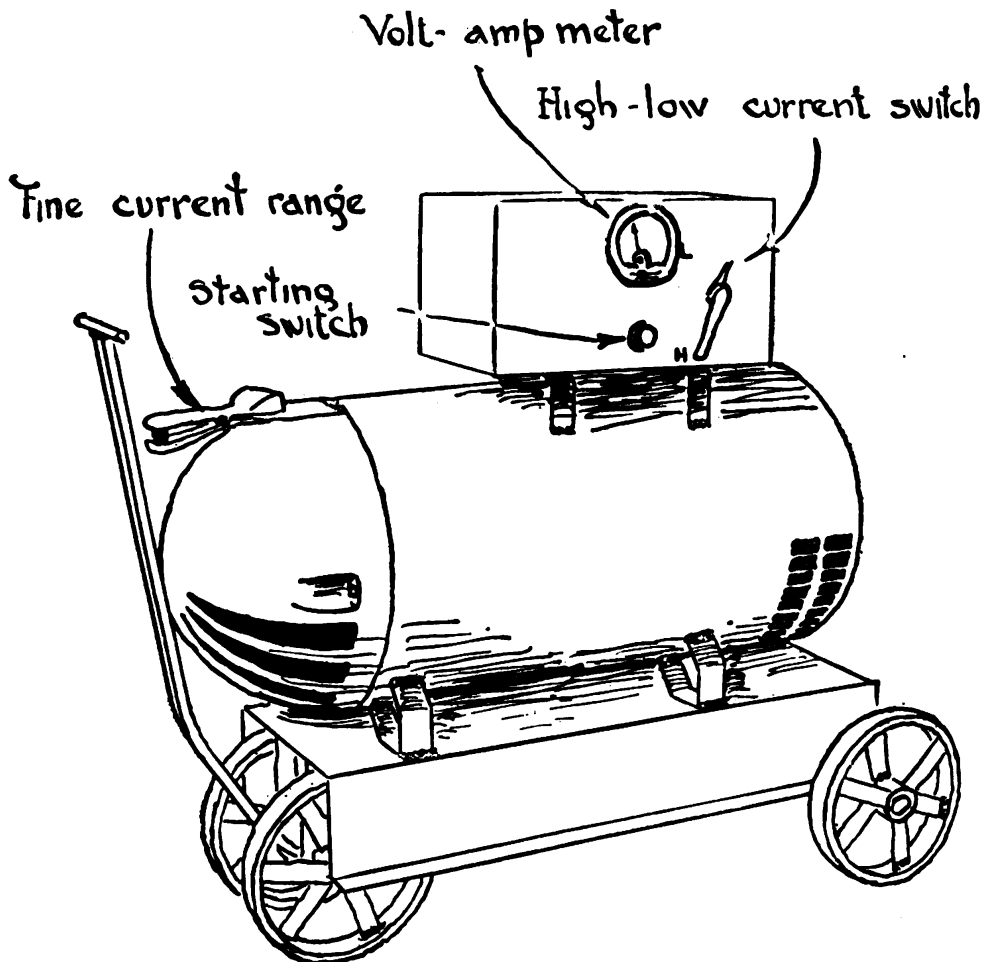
Alternating current, motor-generator type, arc welding machine.
